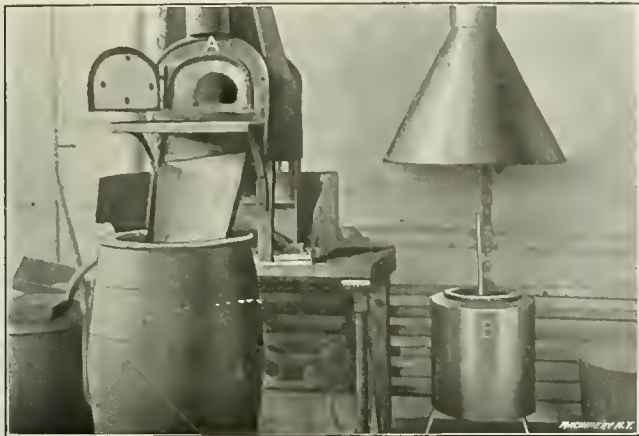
Furnace and Oil Bath in which Bearings are hardened and drawn
